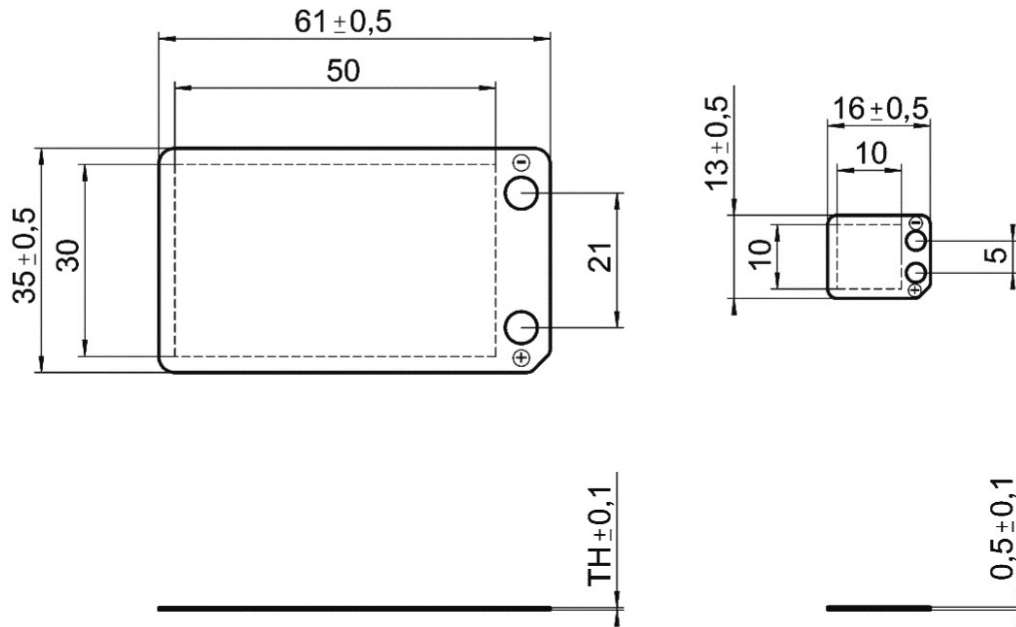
P-876.A (left), P-876.SP1 (right), dimensions in mm
